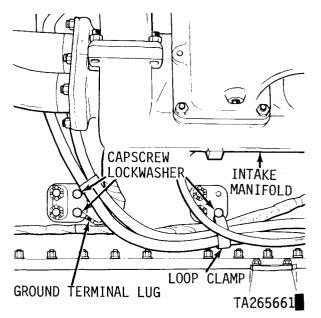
Removing or installing wiring harness and generator cable clamp.
